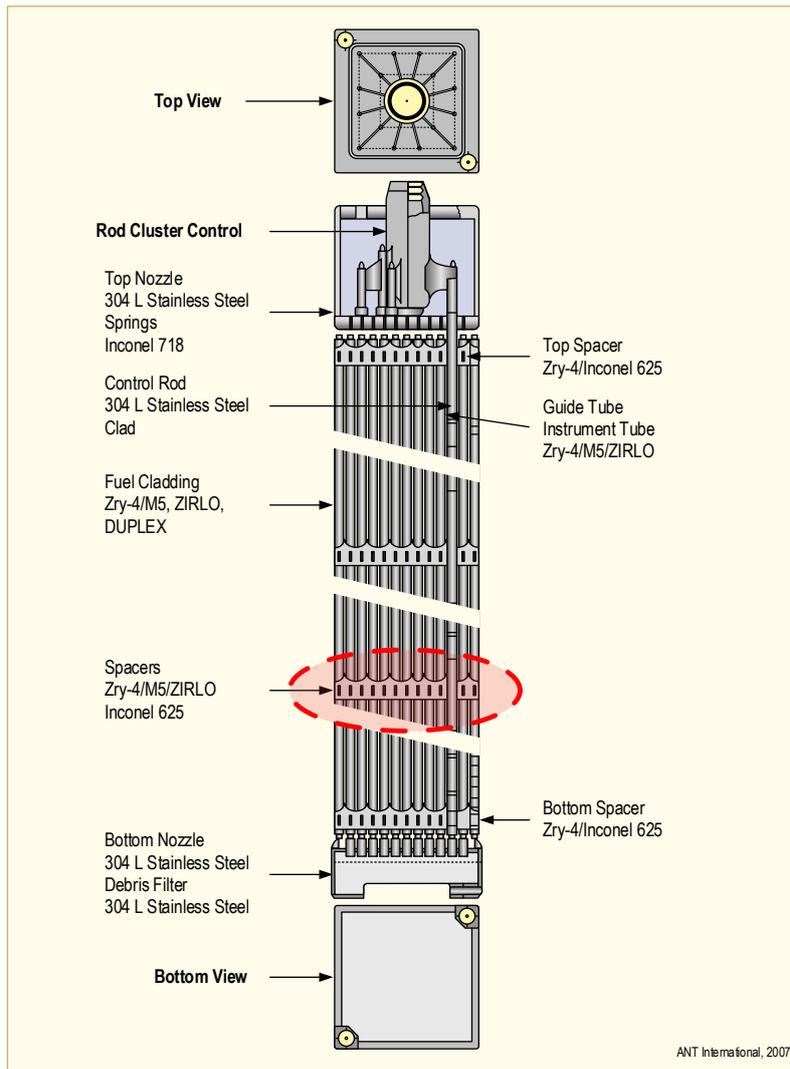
PWR fuel assembly with Alloy 718 spacer grids.
